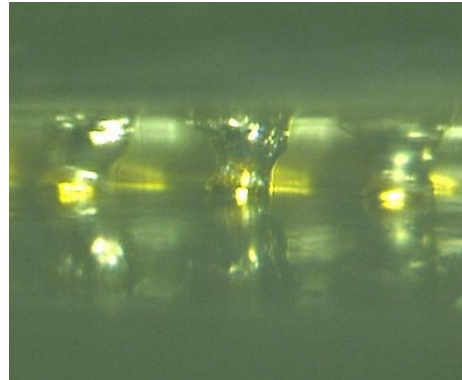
Side view of a soldered DCD-RO. The solder is compensating the alignment mismatch.
